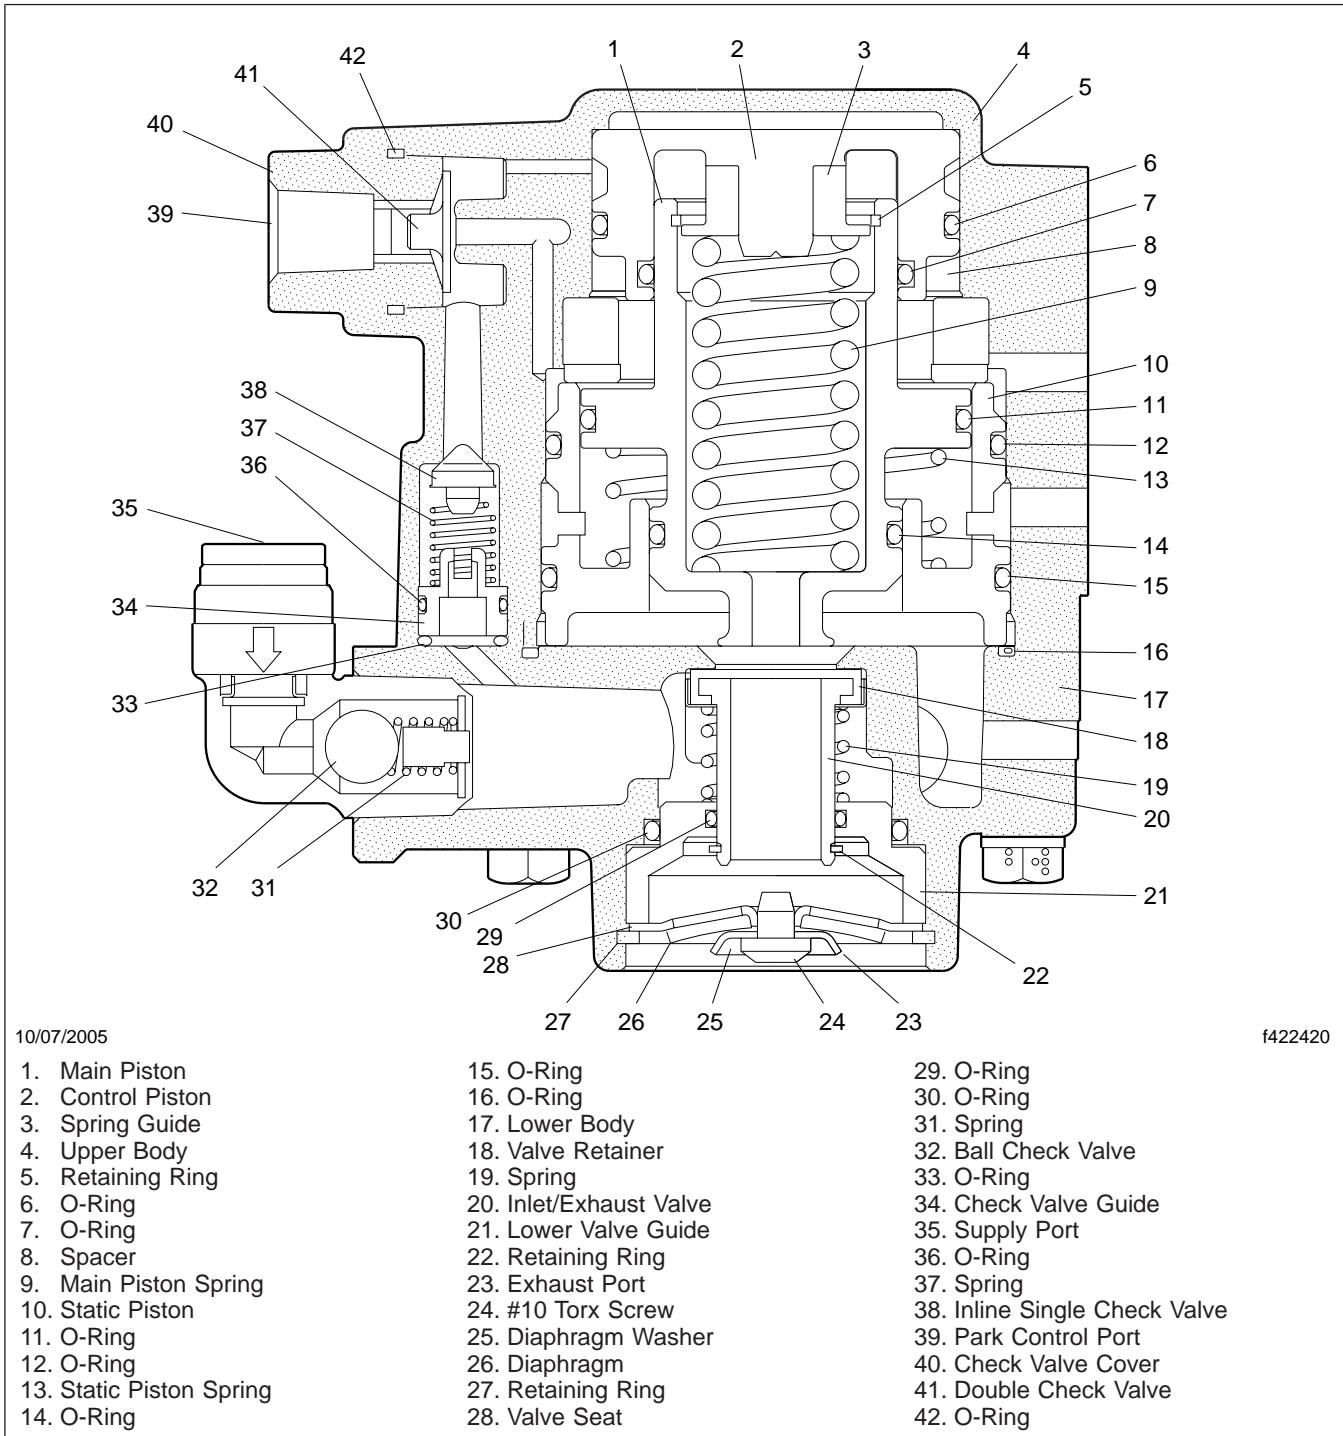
, SR-7 Spring Brake Modulating Valve (sectional view)
